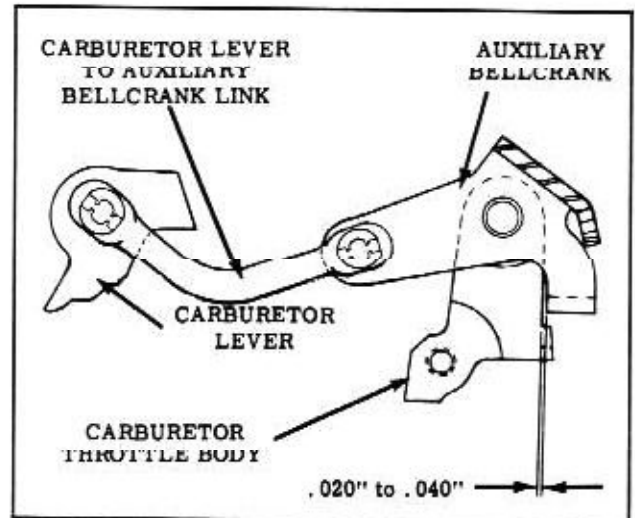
Checking 4GC Carburetor Link (HMT)
